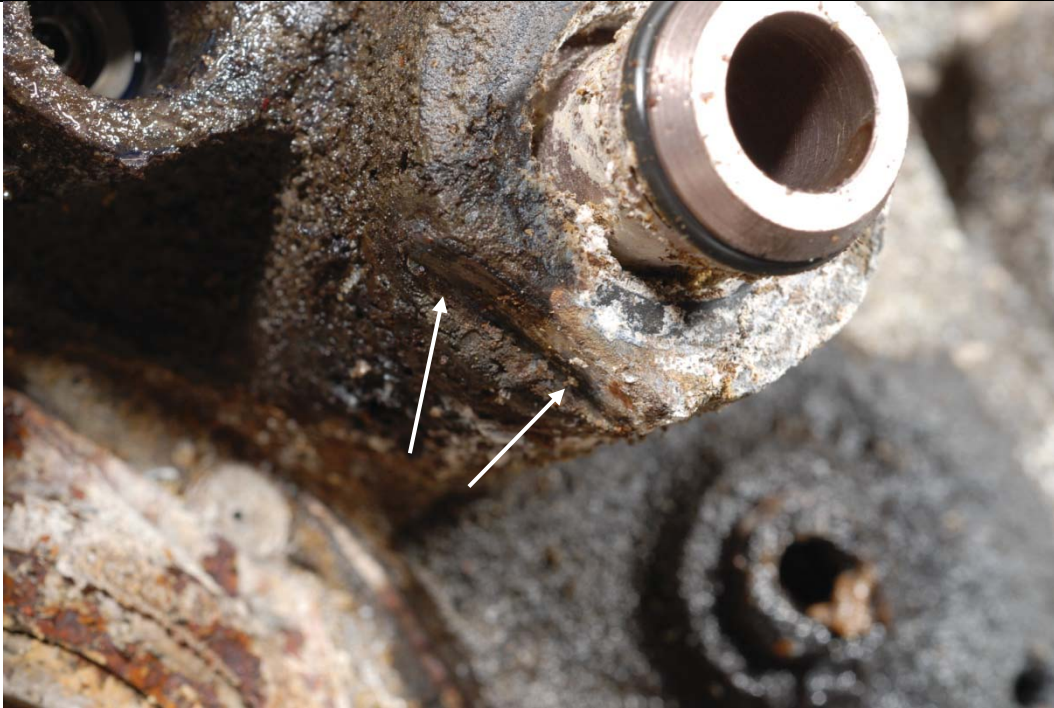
P-79001C, NTS Transfer Tube and Orifice Assembly
